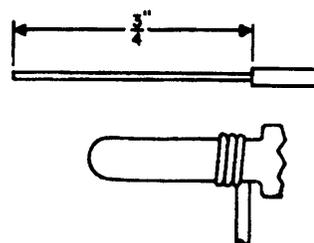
Example of Skinner Length and Soldered, Wrapped Connection.
